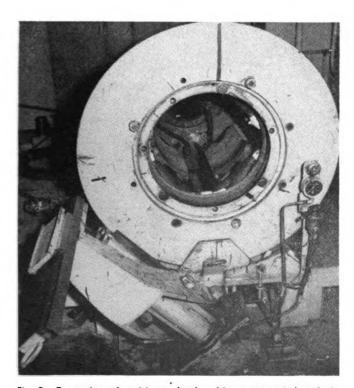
Front view of positioner showing drive-motor switch and air cylinder control valve
